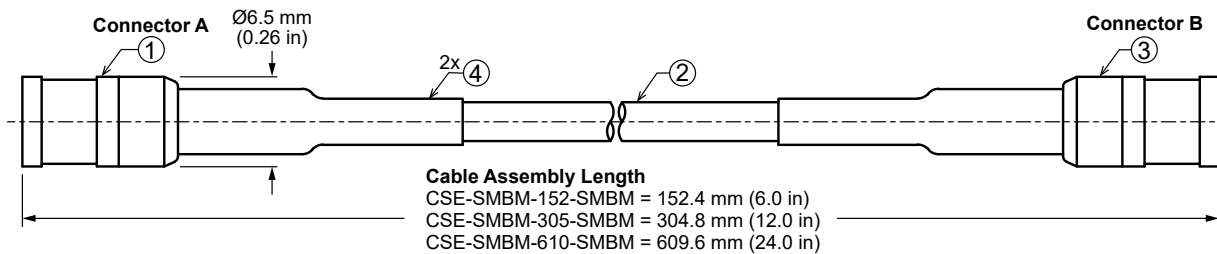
Product Dimensions for the CSE-SMBM-ccc-SMBM Cable Assembly
